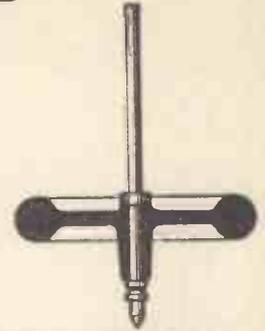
The Body of the Top can be made from a single Brass Casting.
